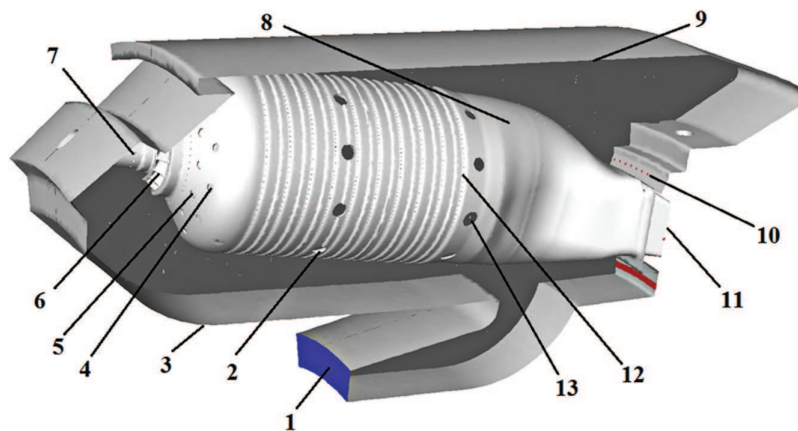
Virtual model of the combustion chamber: 1—air supply after the compressor; 2—radial primary air injection holes; 3—inner casing; 4—second row of front device holes; 5—first row of front device holes; 6—swirler blades; 7—fuel injector; 8—flame tube; 9—outer casing; 10—cooling air supply holes for turbine blade apparatus; 11—combustion products supply to the turbine; 12—flame tube cooling holes; 13—radial secondary air injection holes.
